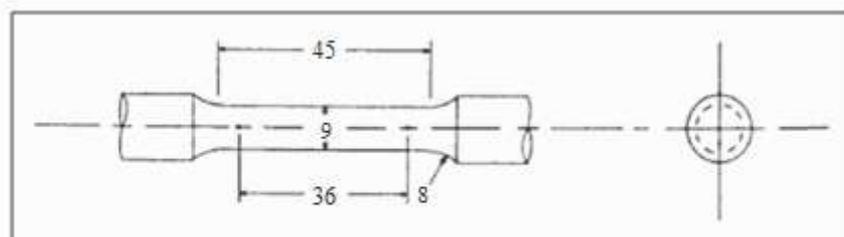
Tensile specimen with dimensions in (mm), E8/E8M-09, ASTM [2010]
